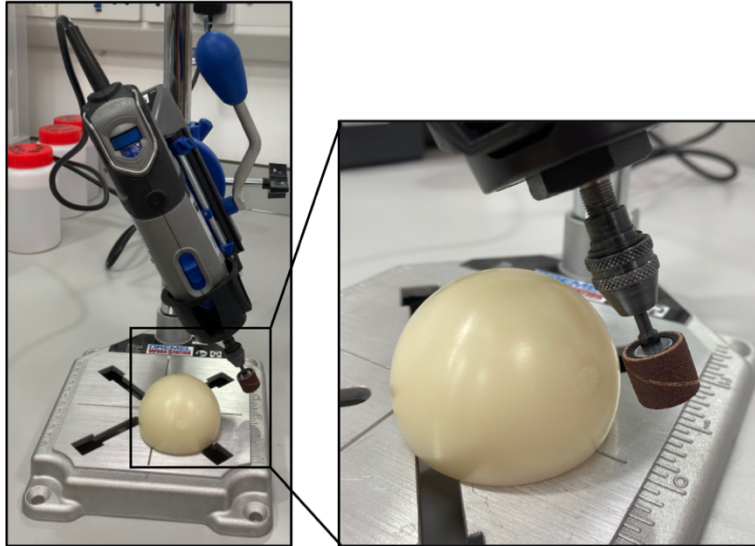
Dremel setup for the removal of material from the external surface of a DM liner.
